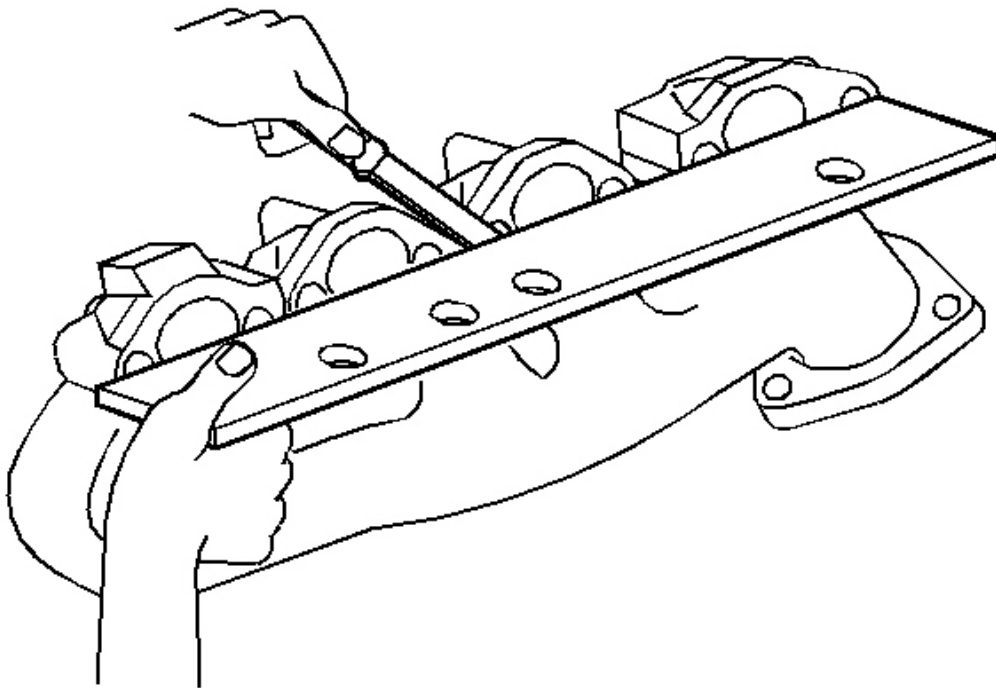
Measuring Exhaust Manifold To Cylinder Head Surface For Warpage
